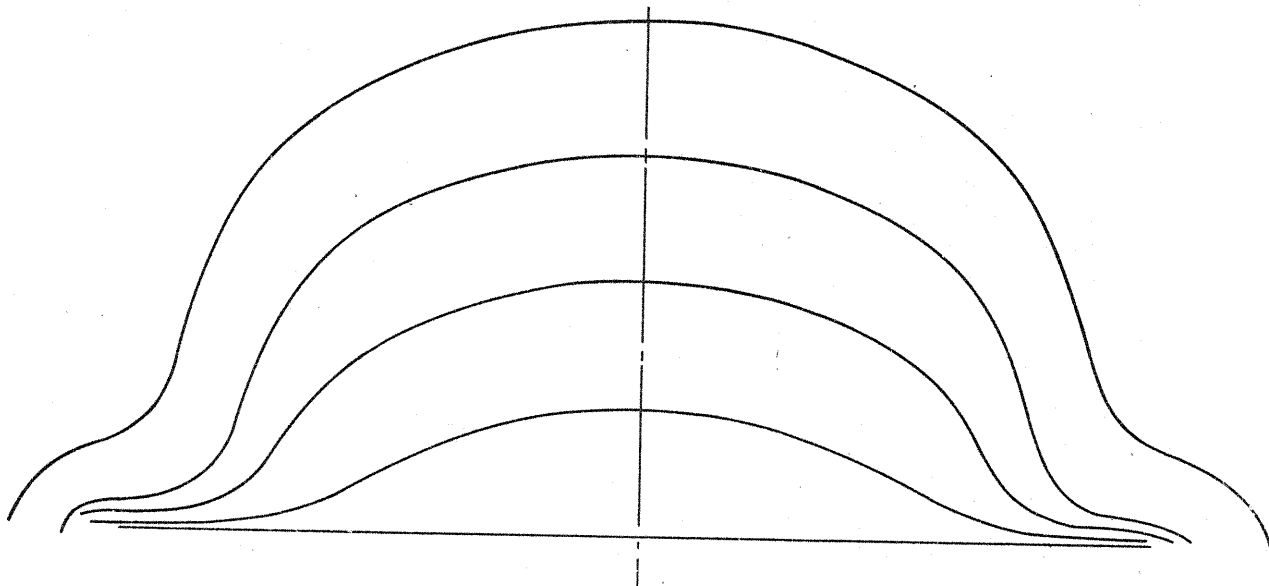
WORKPIECE PROFILES DURING MACHINING WITH ELLIPTIC CATHODE
